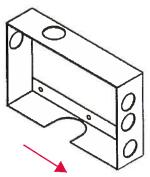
Model MB-P2 - Control Head Mounting Bracket.
